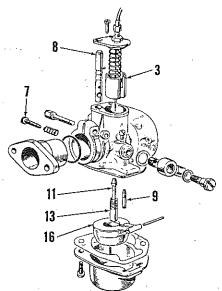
Exploded view of Zenith carburetor used on some models.
